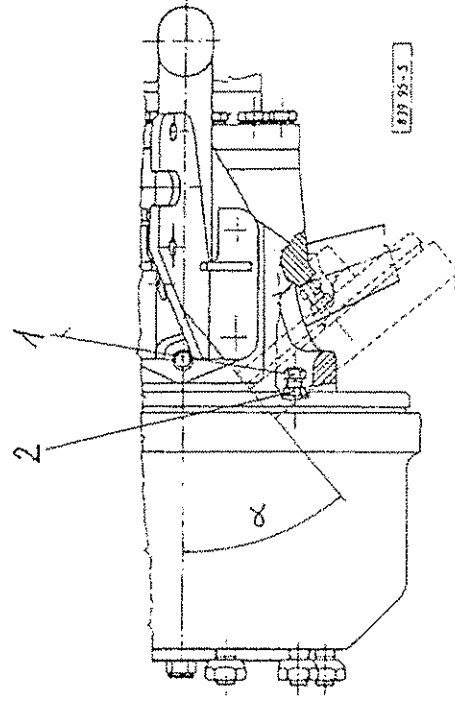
ADJUSTING THE MAX. INNER WHEEL TURN ANGLE
